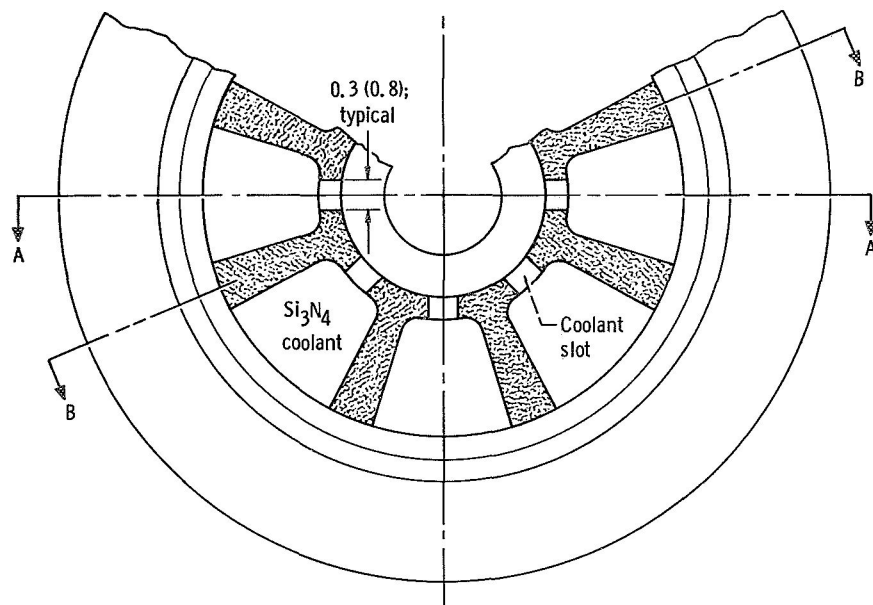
Passively cooled chamber-nozzle design. Dimensions are in inches (cm).
